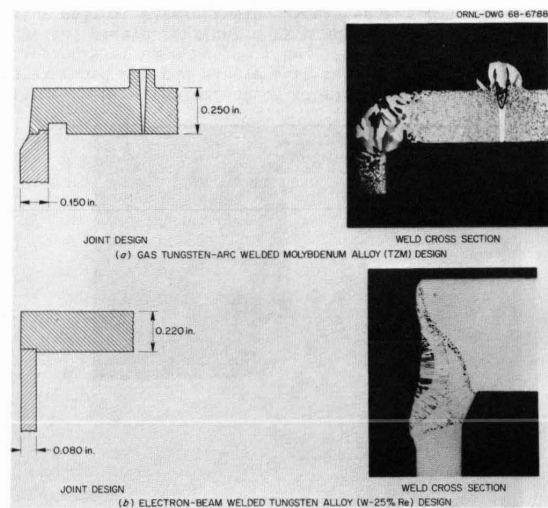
Joint designs and welding results for refractory metal capsules. (a) cross section approximately 3x and (b) cross section approximately 6x.
